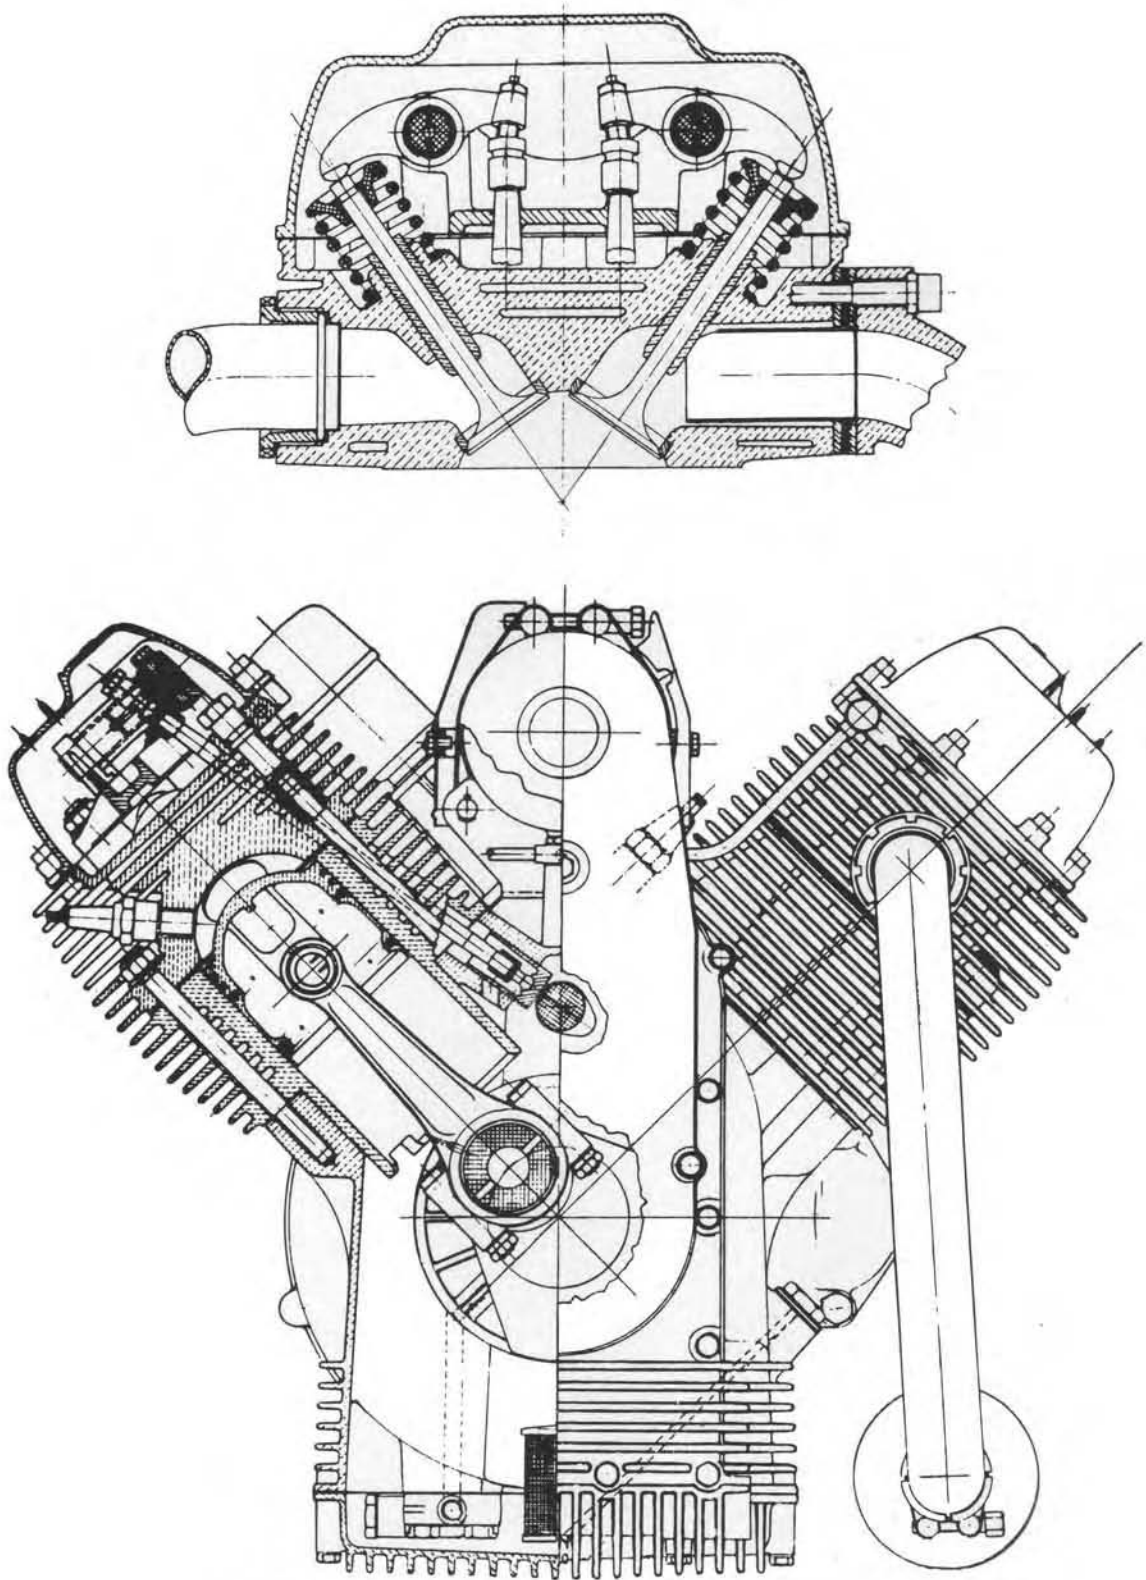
Front view of engine showing sectional drawing of valve gear mechanism.
